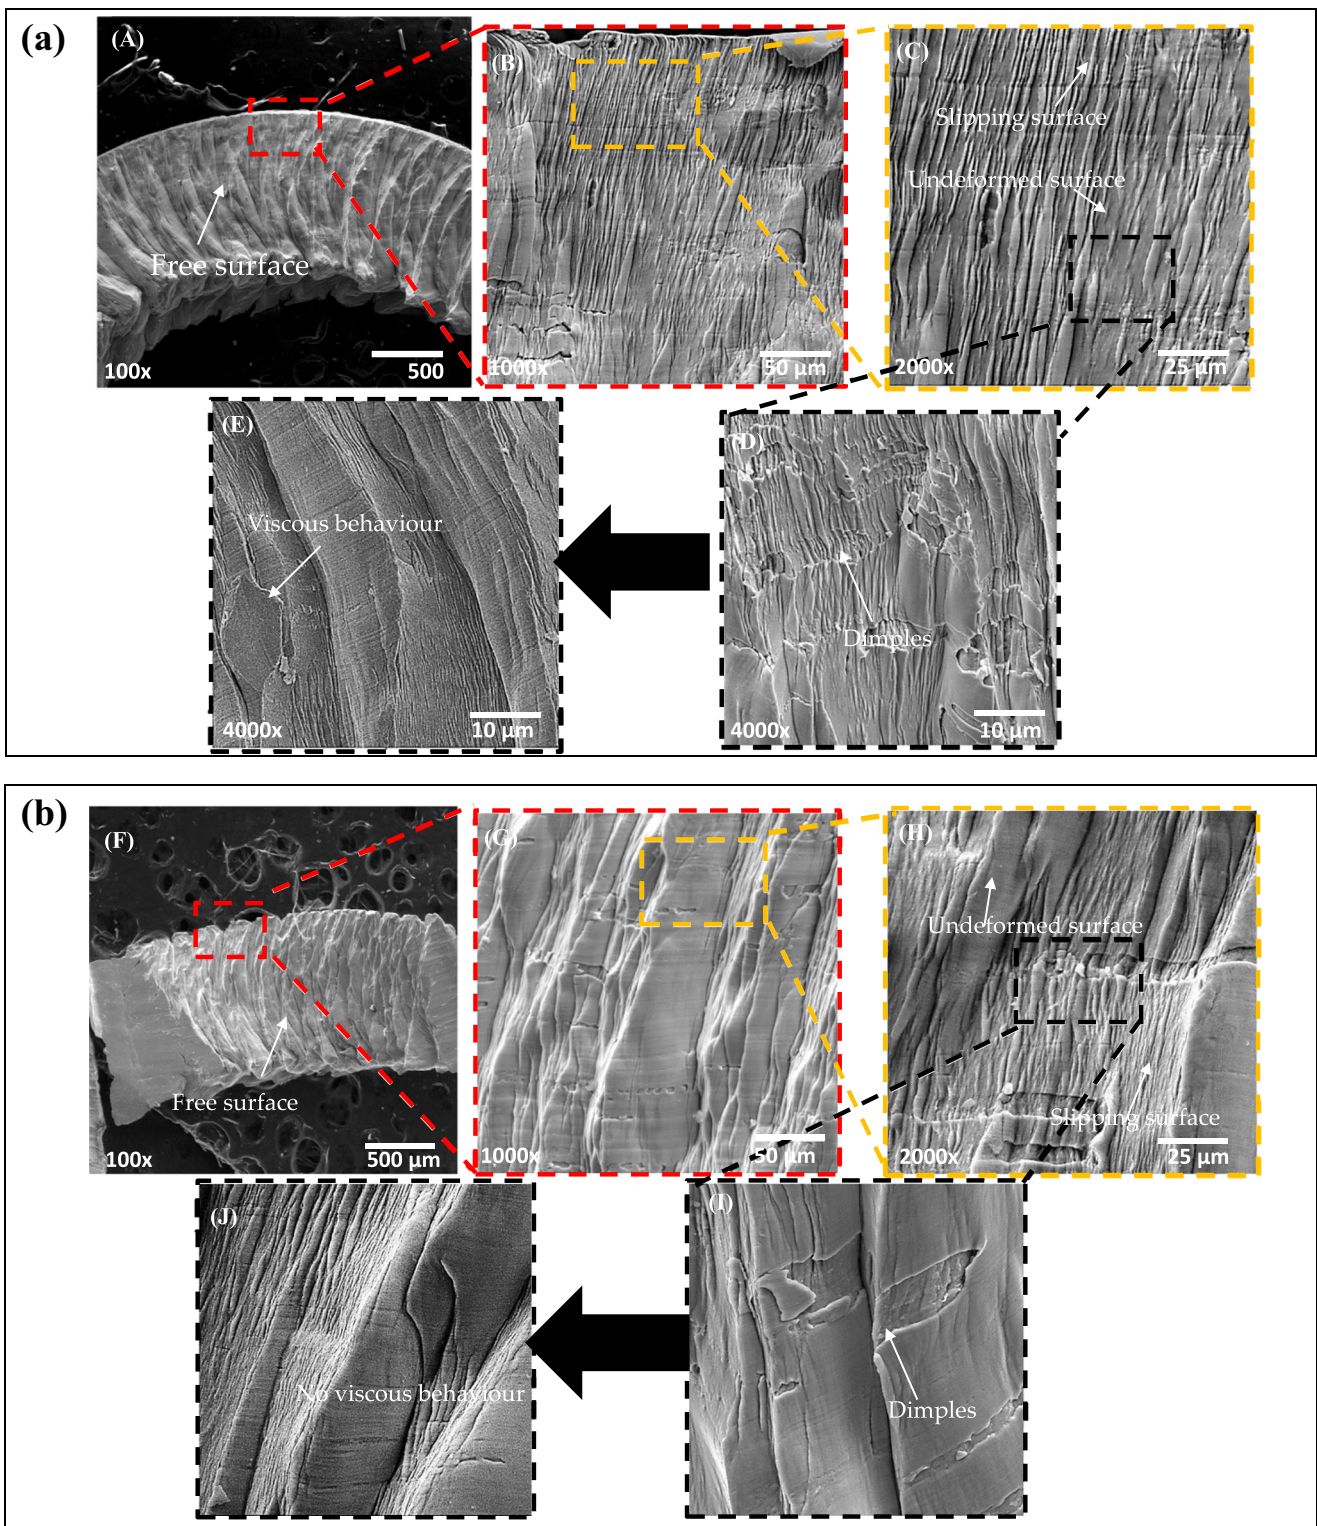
Chip morphology obtained in a dry and b HPC; (A–D) and (F–I) images of free chip surface, generated with new tool and (E–J) with worn tool
